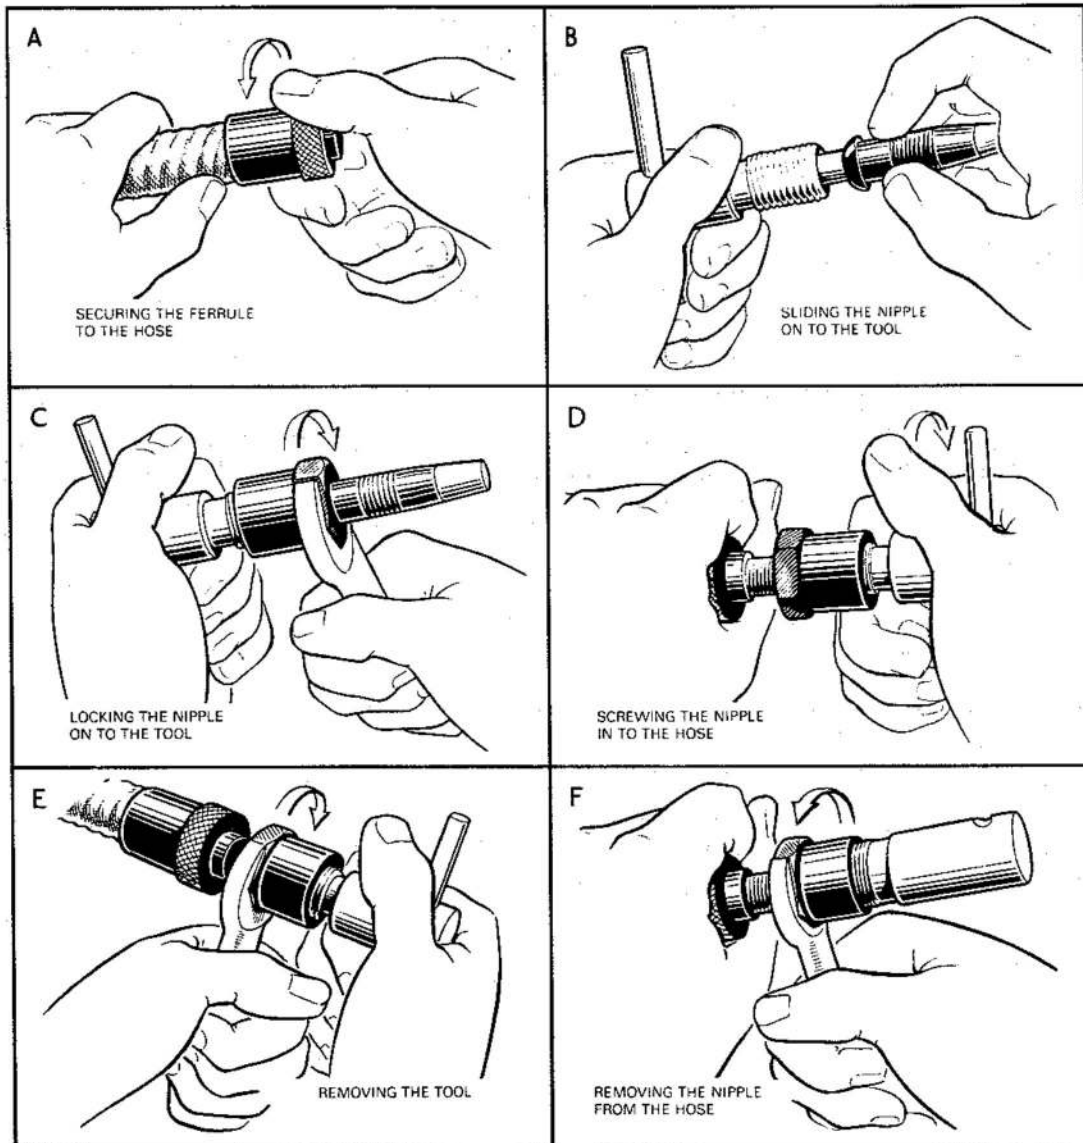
Attachment and removal of AGS (Flylink) end fitting
